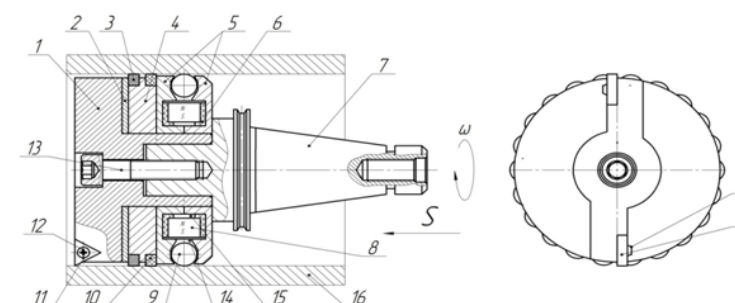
Tool for combined processing: 1 – boring head; 2 – sealing ring; 3 – brush; 4 – bushing; 5 – discs; 6 – holder; 7 – milling mandrel; 8 – sources of magnetic force (cylindrical permanent magnets); 9 – deforming elements; 10 – felt bushing; 11 – screw; 12 – carbide cutting insert; 13 – screw; 14 – annular chamber; 15 – radial holes; 16 – workpiece
